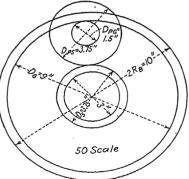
Layout for the radial-engine cam-ring drive, Par. 10-10.
